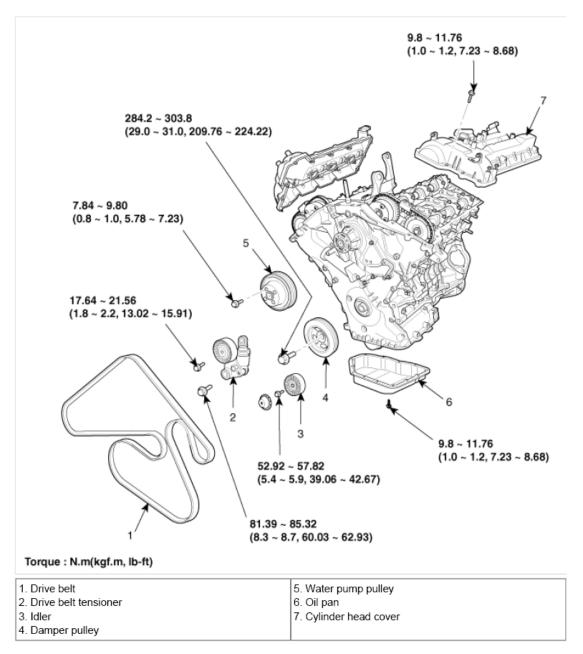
Exploded View Of Timing Chain System With Torque Specification (1 Of 2)
